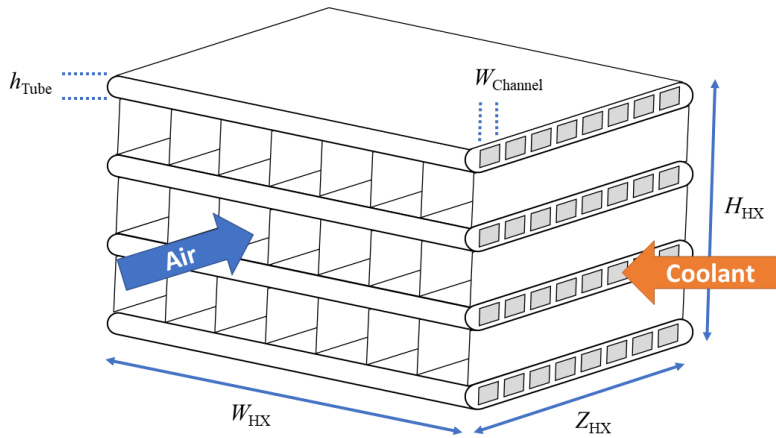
Flat minichannel tube - offset strip fin geometry.
